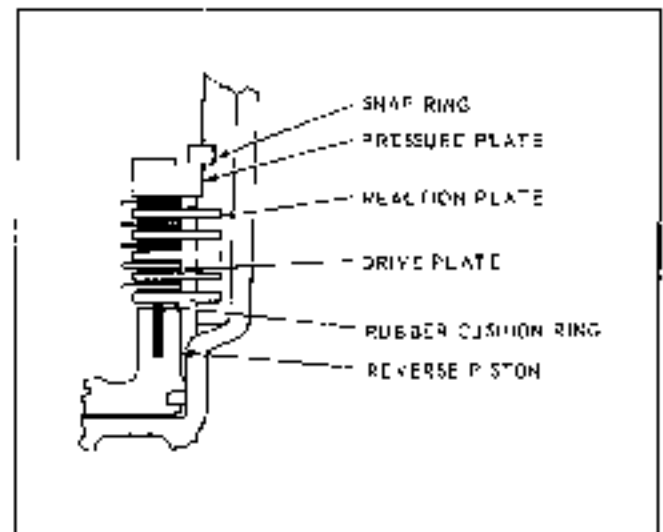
F-89 Reverse Clutch Pack Assembly Sequence
